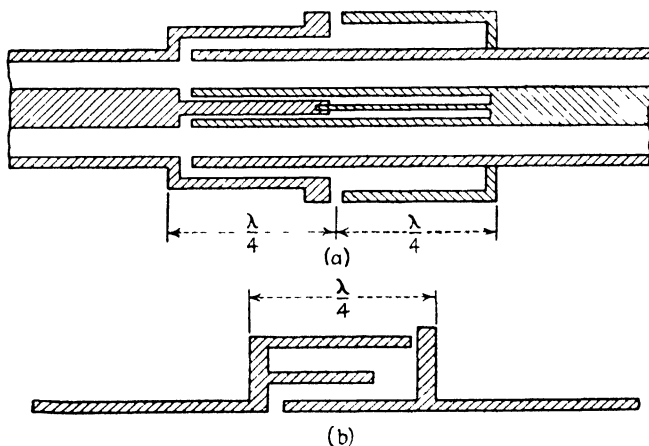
Choke flange coaxial joints, extended (a) and folded (b).
